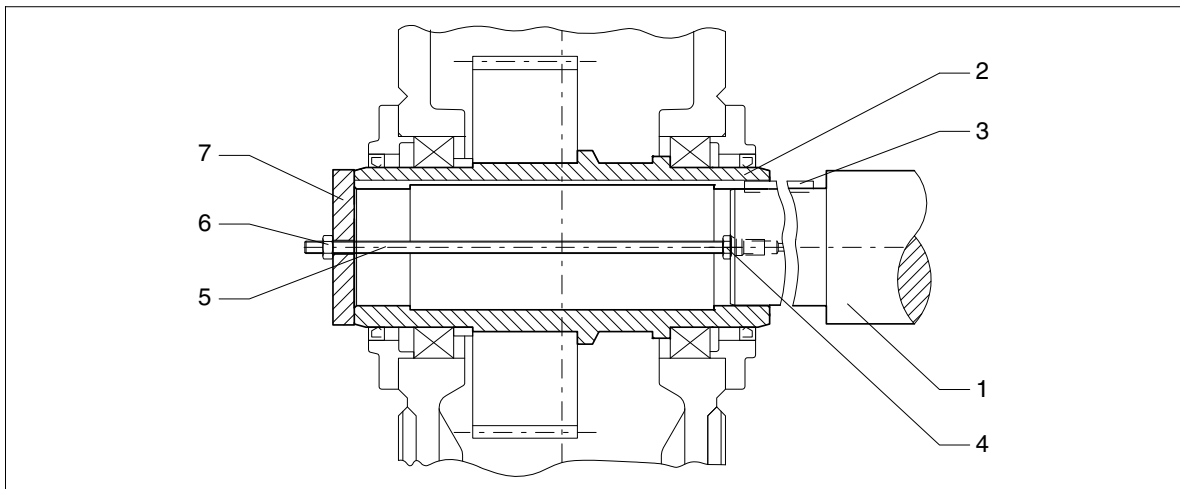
Hollow shaft with parallel keyway, fitting with threaded spindle
